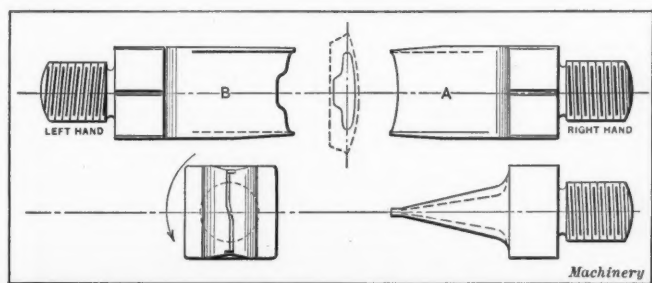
Turning Tools used in the Machine shown in Fig. 3
